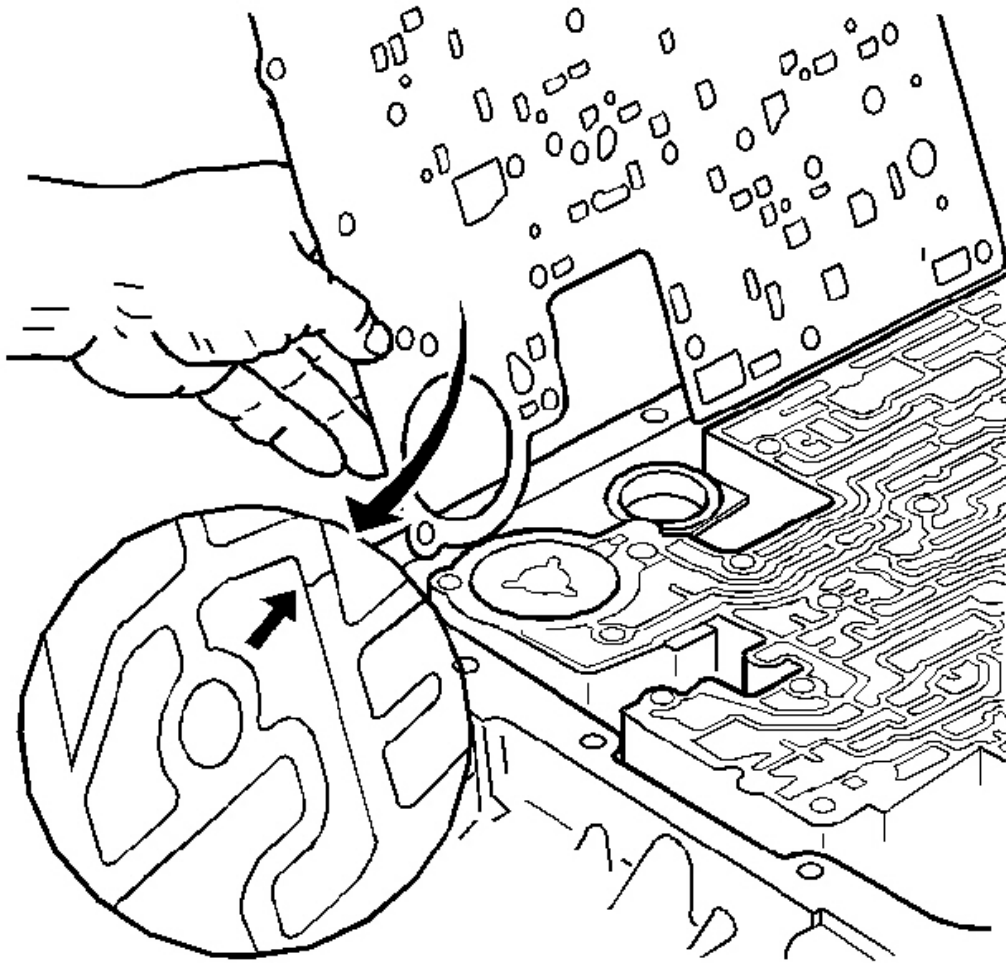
Inspecting Spacer Plate To Case Gasket For Witness Marks
